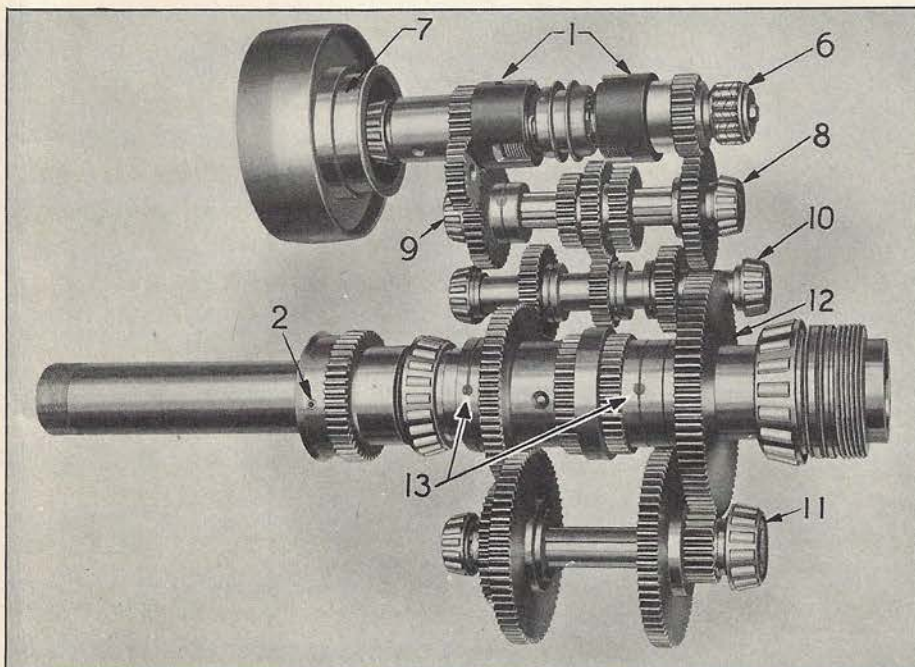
Twelve Speed Head of No. 5 Turret Lathes
